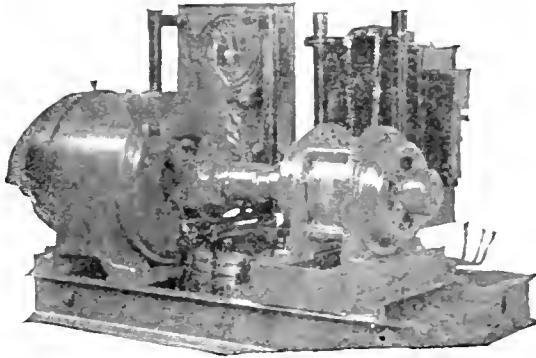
Rear View of Constant-energy Arc-welding Motor-generator Set Complete with Starting and Control Equipment
